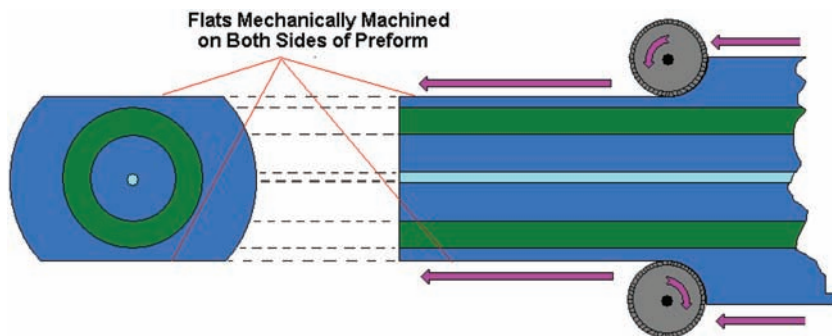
Stage 2 of elliptical-jacket fabrication: preform machining.
